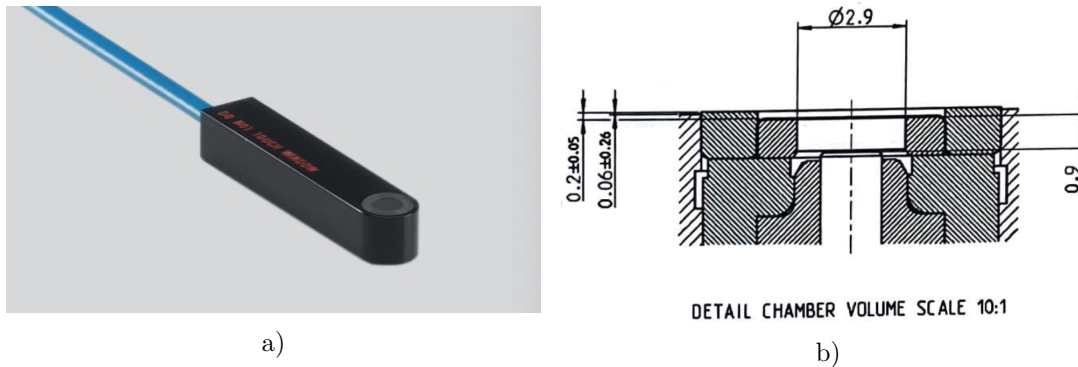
a) Photo and b) dimension drawing of the soft X-ray chamber. Pictures acquired from Ref. [152, 153]
